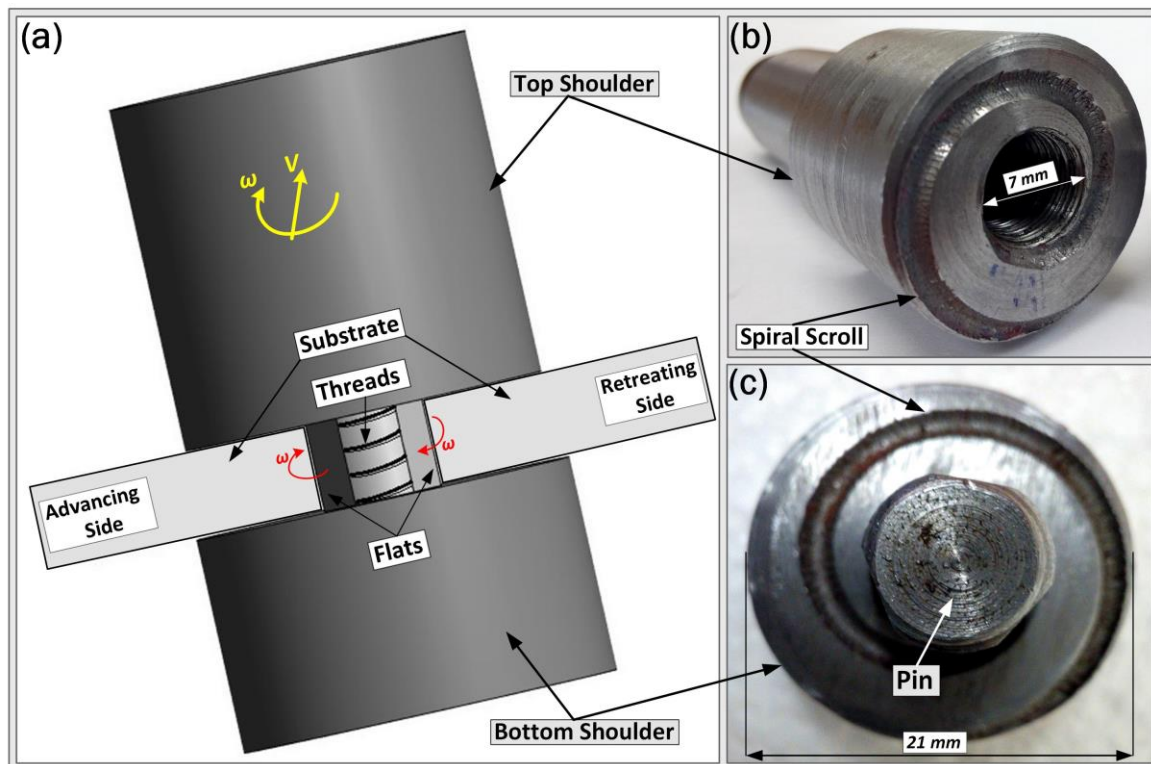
Fully-featured Bobbin-Tool (tri-flat threaded pin and spiral scrolled shoulders); (a) Schematic of the bobbin-tool in interaction with the cross-section view of the substrate between the shoulders-gap, (b) disassembled top shoulder with the drilled position of the cantered-pin, (c) disassembled bottom shoulder and the tri-flat pin in the middle.
